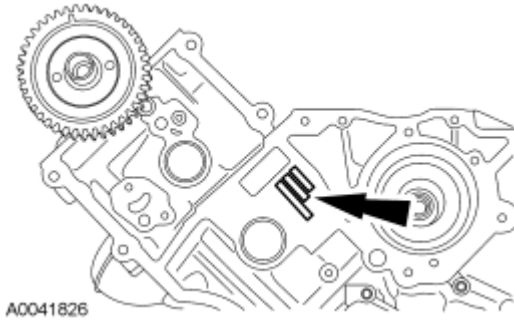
Identifying Main Bearing Code Found On Front Of Engine Block
